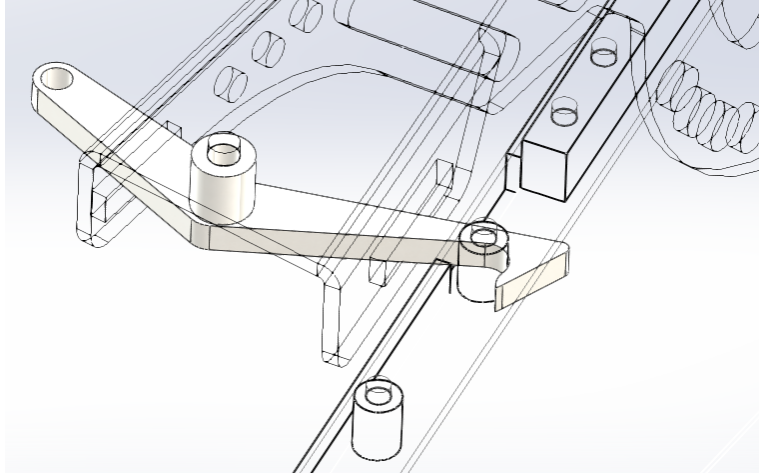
LATCH ASSEMBLY IN MAIN ASSEMBLY
